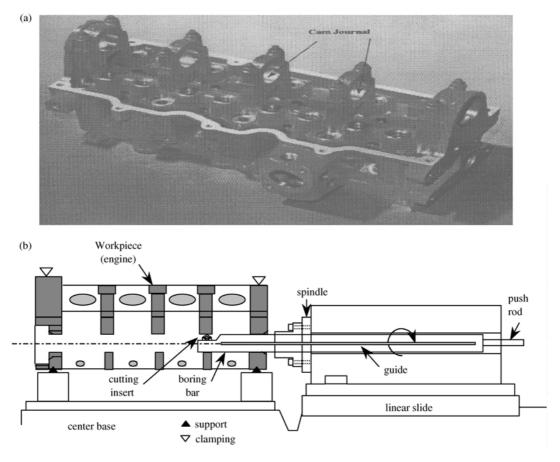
Journals of an overhead cam cylinder head (a) and crank journal boring of an engine block (b).
